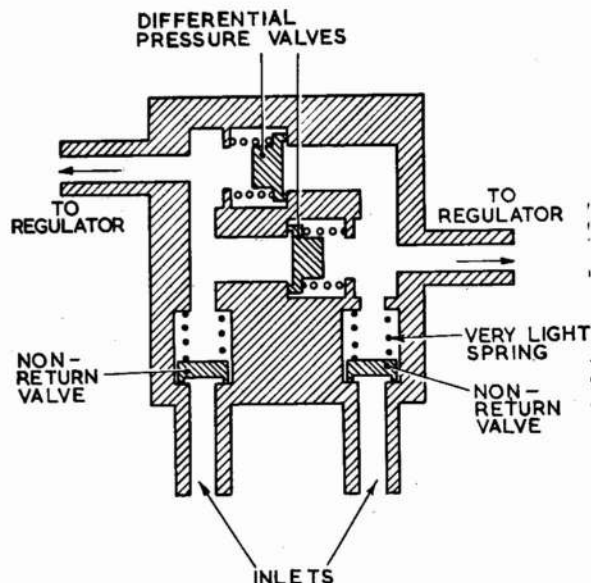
Two-way liquid oxygen check valve (Ref. No. 6D/2265), sectional view
